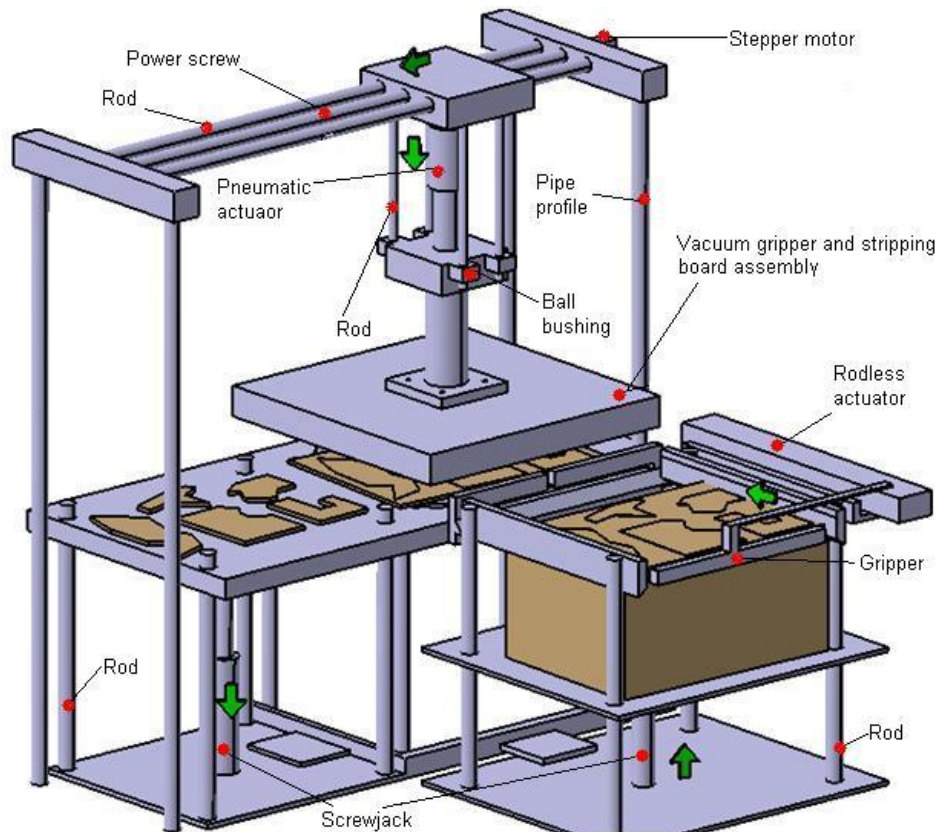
Concept 3: Carton Board Separation Machine Using Die and Vacuum Technique
